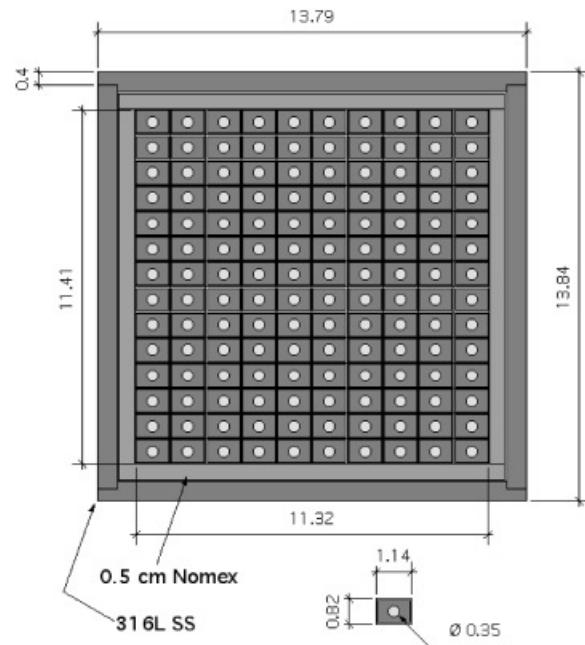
A cross-sectional design view of one of the interlocked coils, showing the winding pack, Nomex insulation, and stainless steel vacuum case as well as the dimensions of the cross section of the rectangular copper conductor and its circular cooling channel. Units are in centimeters.
